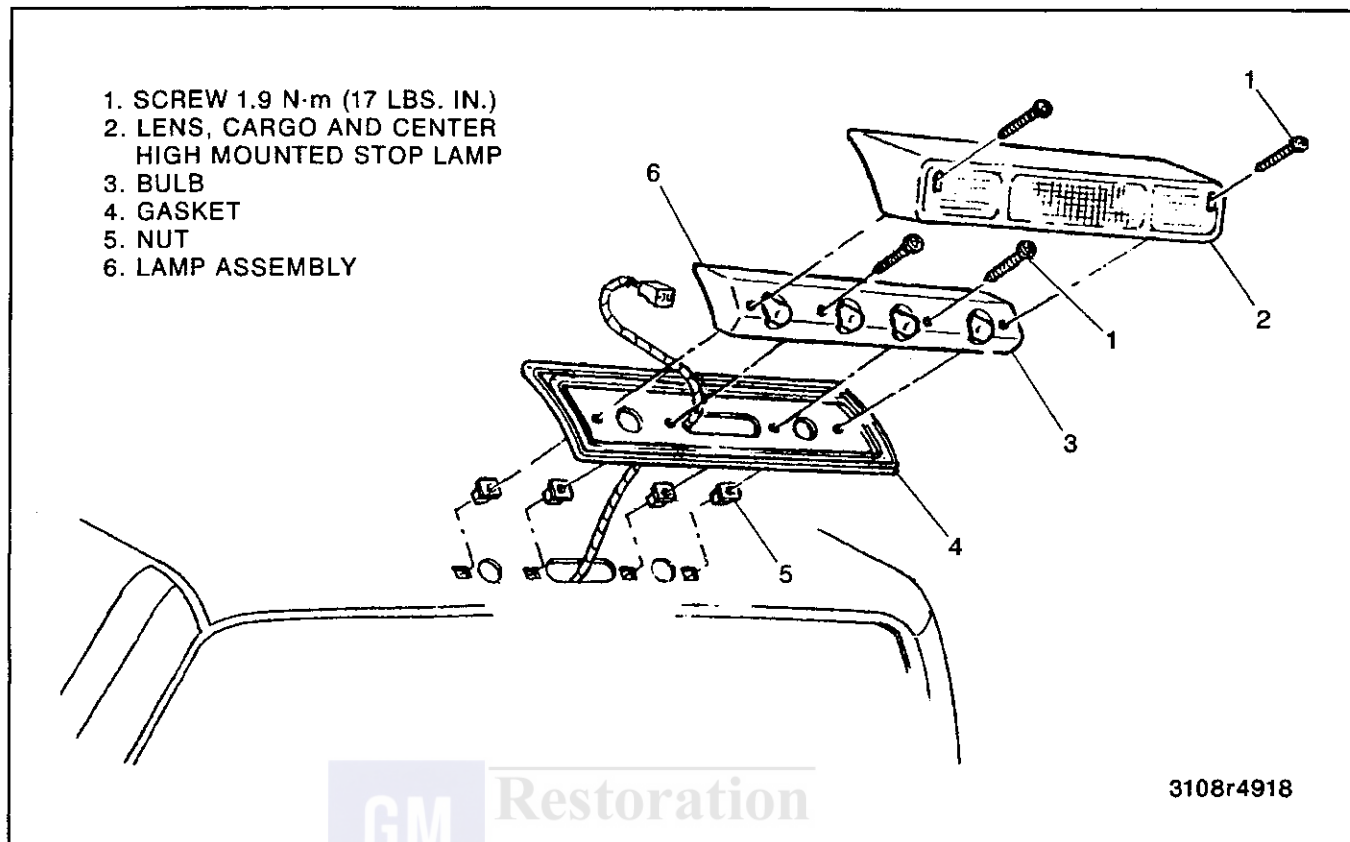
Cargo/Stoplamp Components (Pickup and Cab/Chassis Models)
